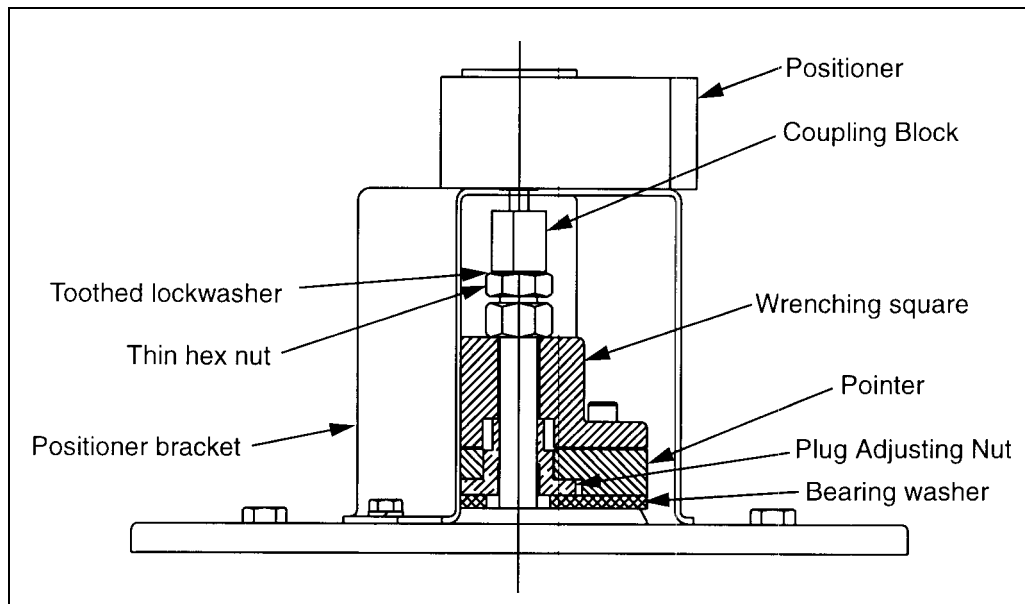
Coupling Block Location on 3 & 4 Way Plug Valves
